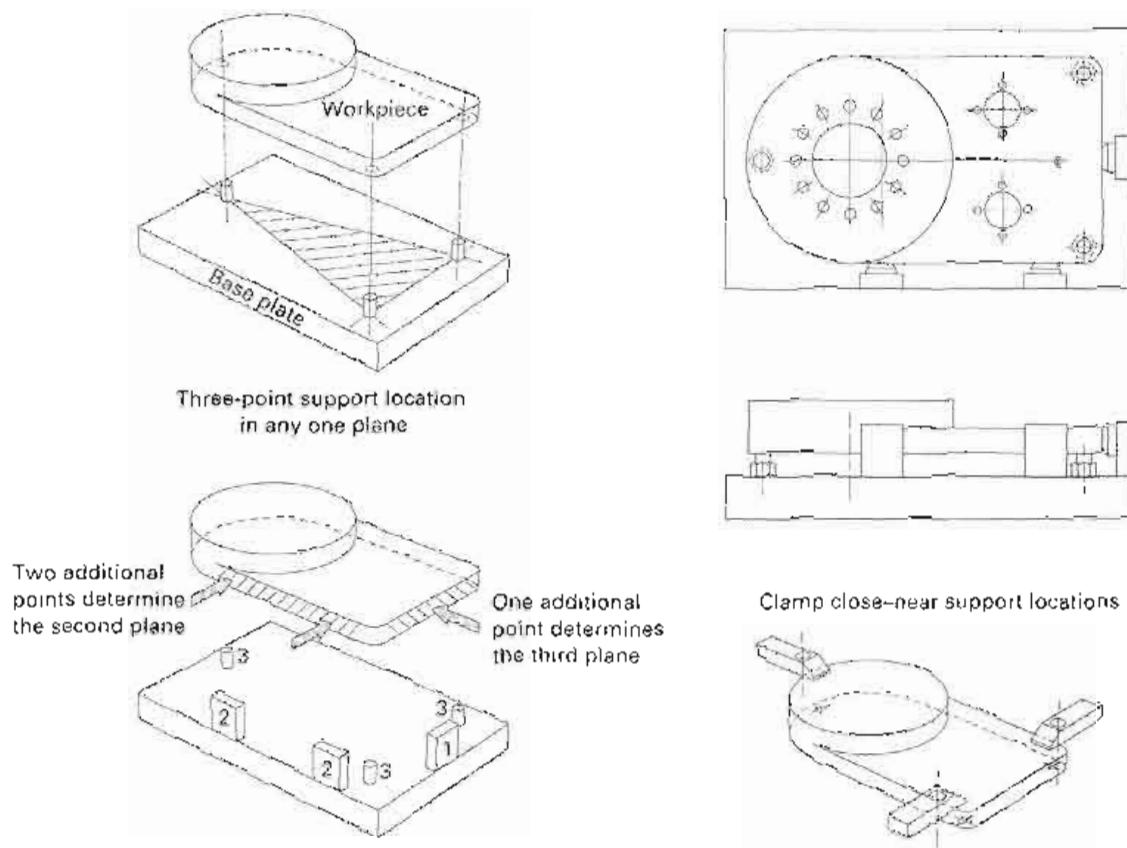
Workpiece location is based on the 3-2-1 principle. Three points will define a base surface, two points in a vertical plane will establish an end reference, and one point in a third plane will positively locate most parts.
